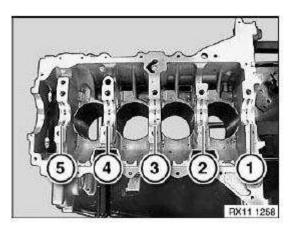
Identifying Crankcase Bearing Groove Courtesy of BMW OF NORTH AMERICA, INC.
